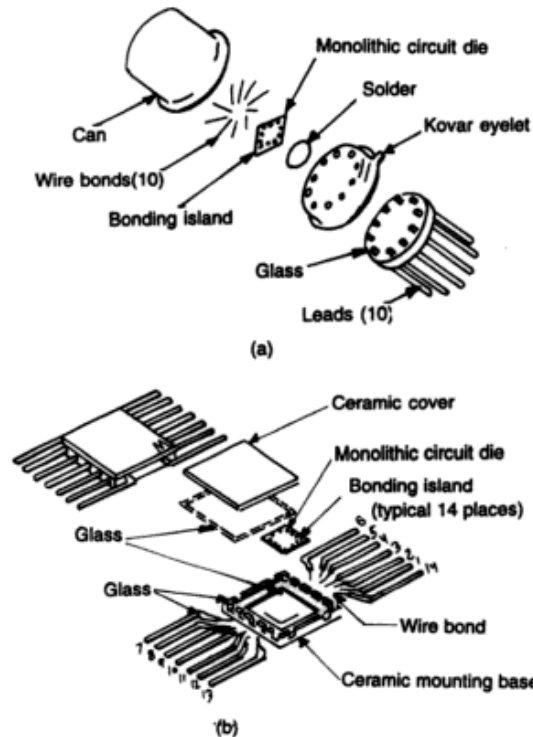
Exploded view of (a) lead TO-5 package (b) 14-lead version of the flat package, showing the various components as well as the completed fat package
